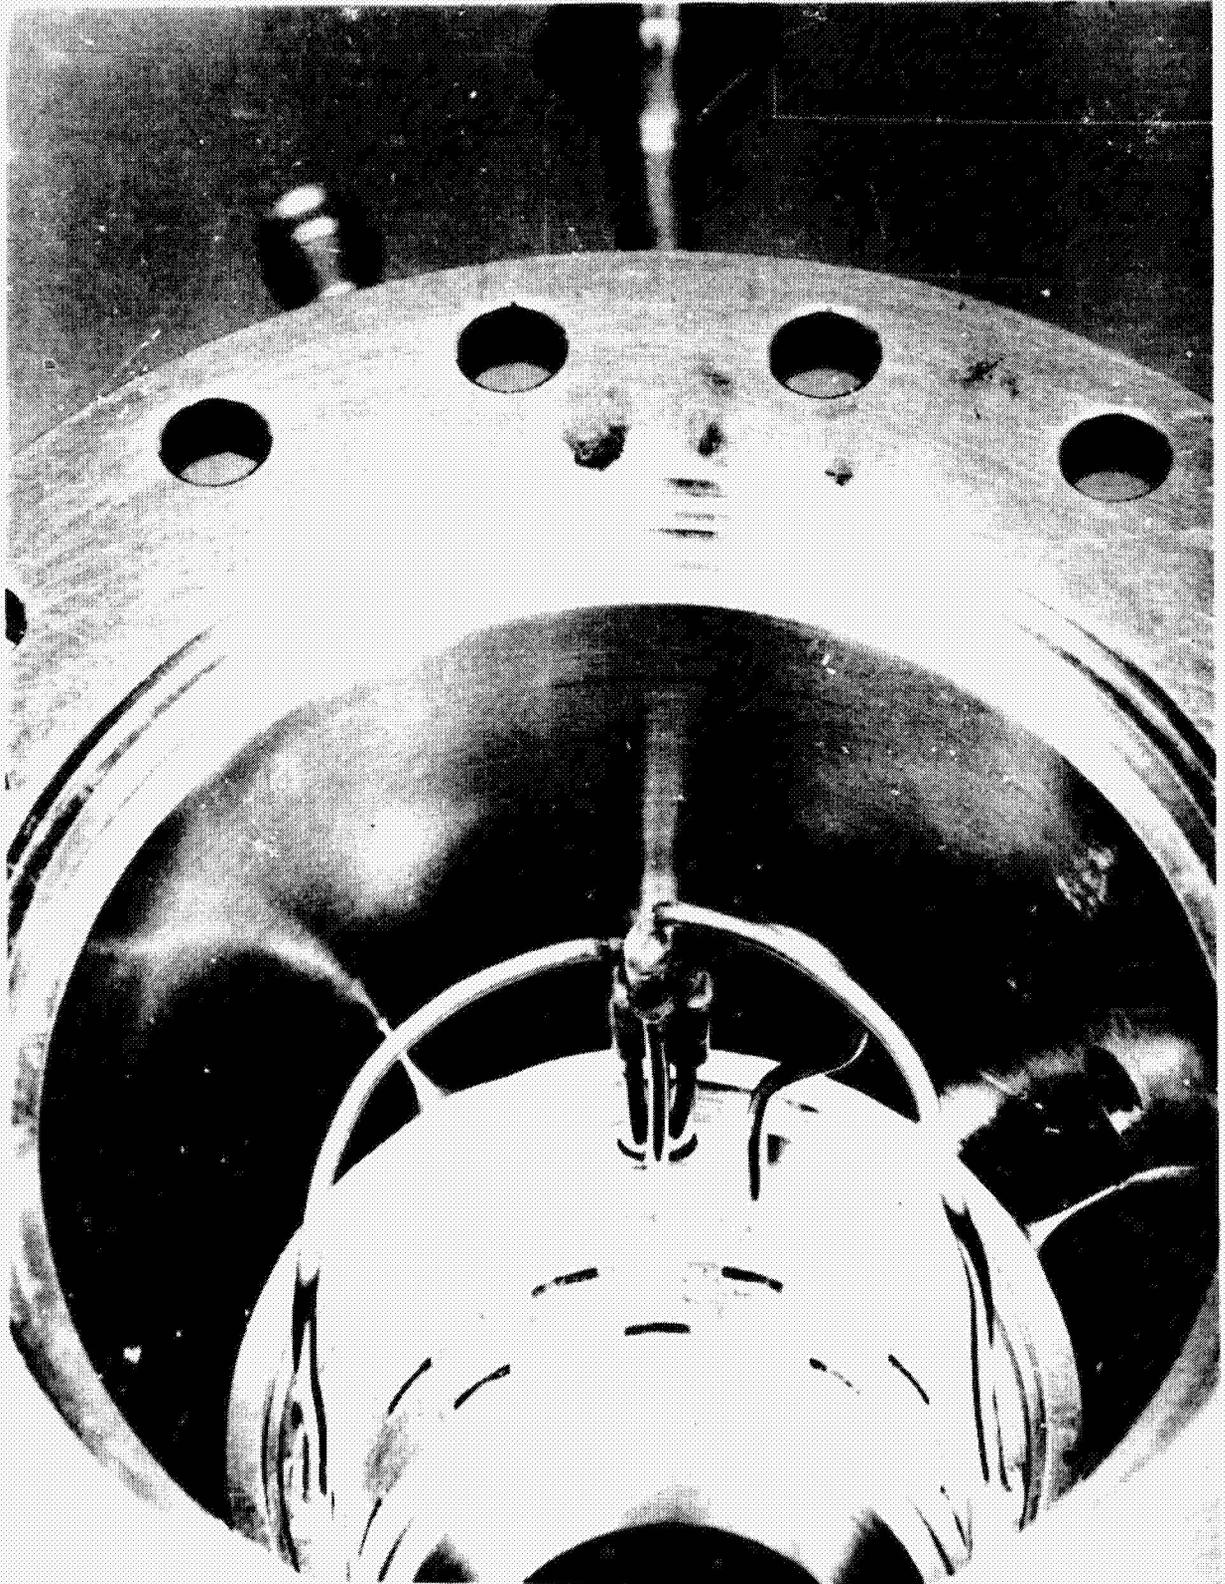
Pump Inlet Housing with Hydrostatic Bearing
